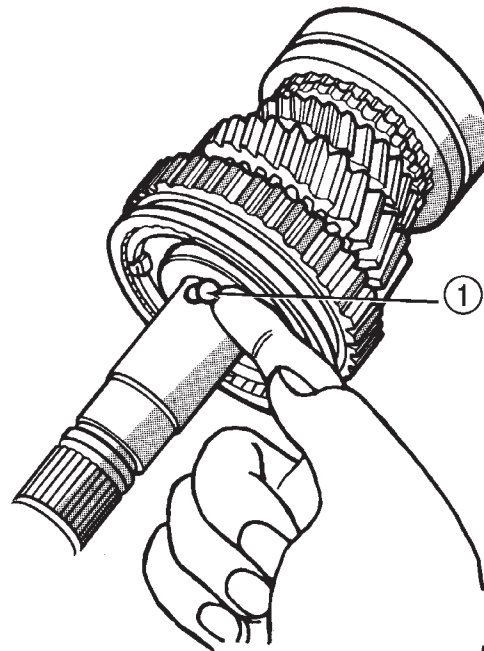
Install First Gear Bearing Inner Race Lock Ball J8921-58
